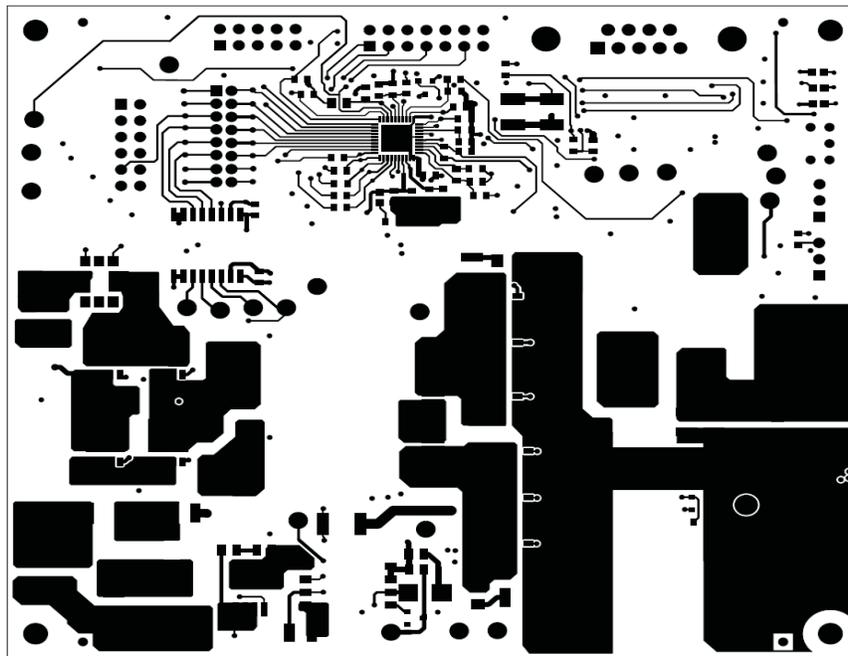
UCD3138HSFBEVM-029 Top Copper (top view)
